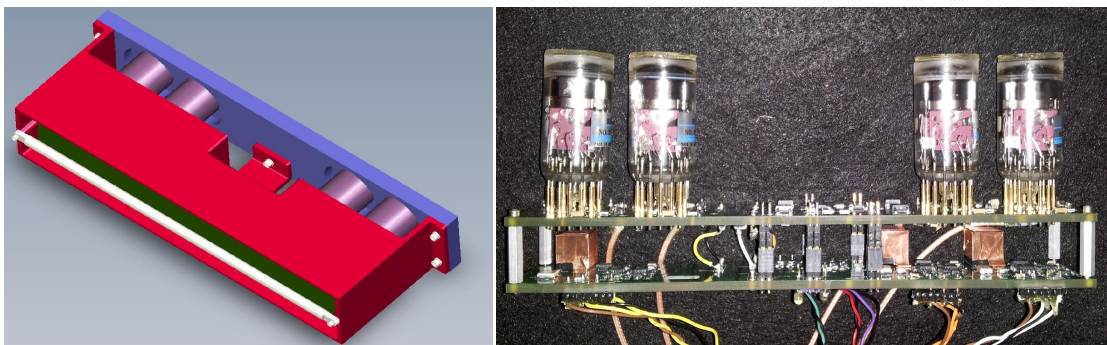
Left: a CAD drawing of the BSD quartet PMT assembly. Right: a prototype version of the electronics for this assembly.
